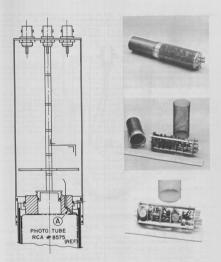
Tube base for #8575 photomultiplier. A refers to printed circuit board jack used to make connection to external electrostatic shield.
